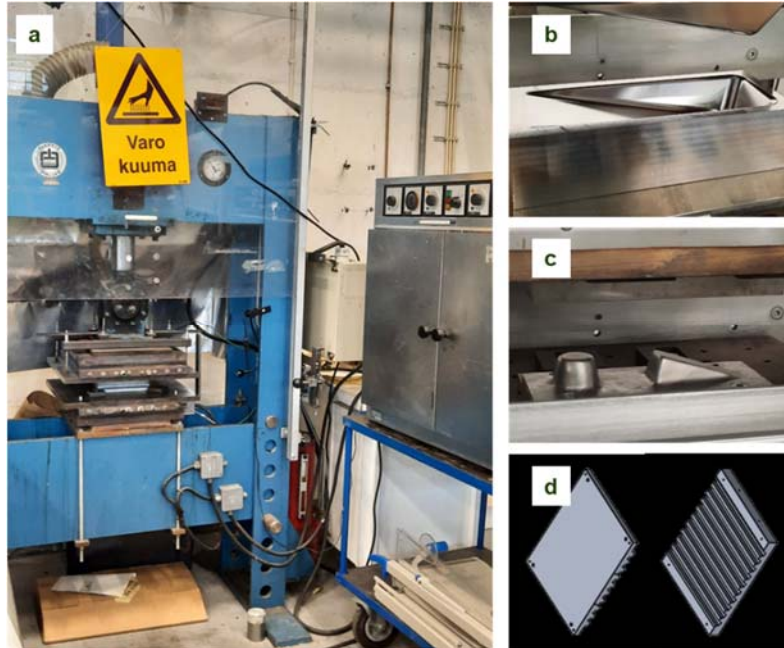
(a) Vekomet hydraulic press and heat oven for thermoforming (b) 20x8 cm slope type mold with 30 mm deepest draw from slope top to bottom (c) cup shape mold and (d) 50x40 cm wave shape mold with 17 mm wave depth
